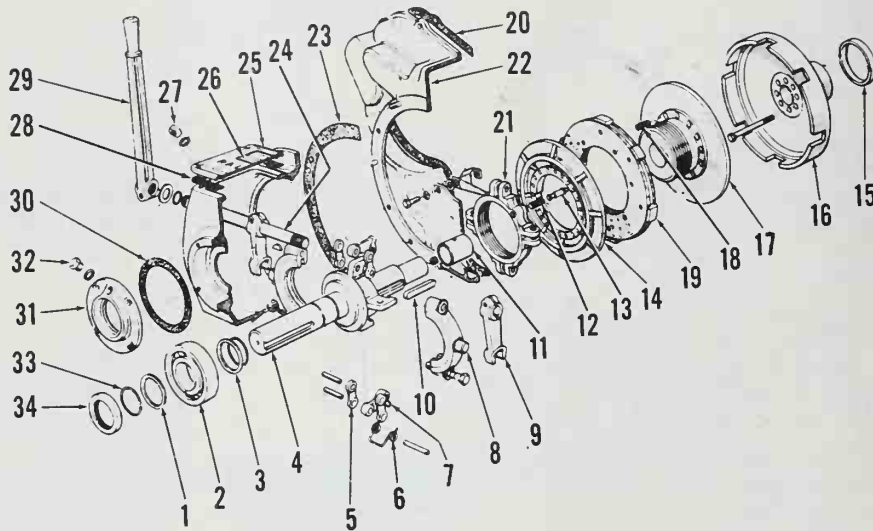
Exploded view of direct drive clutch used on HR engines.
